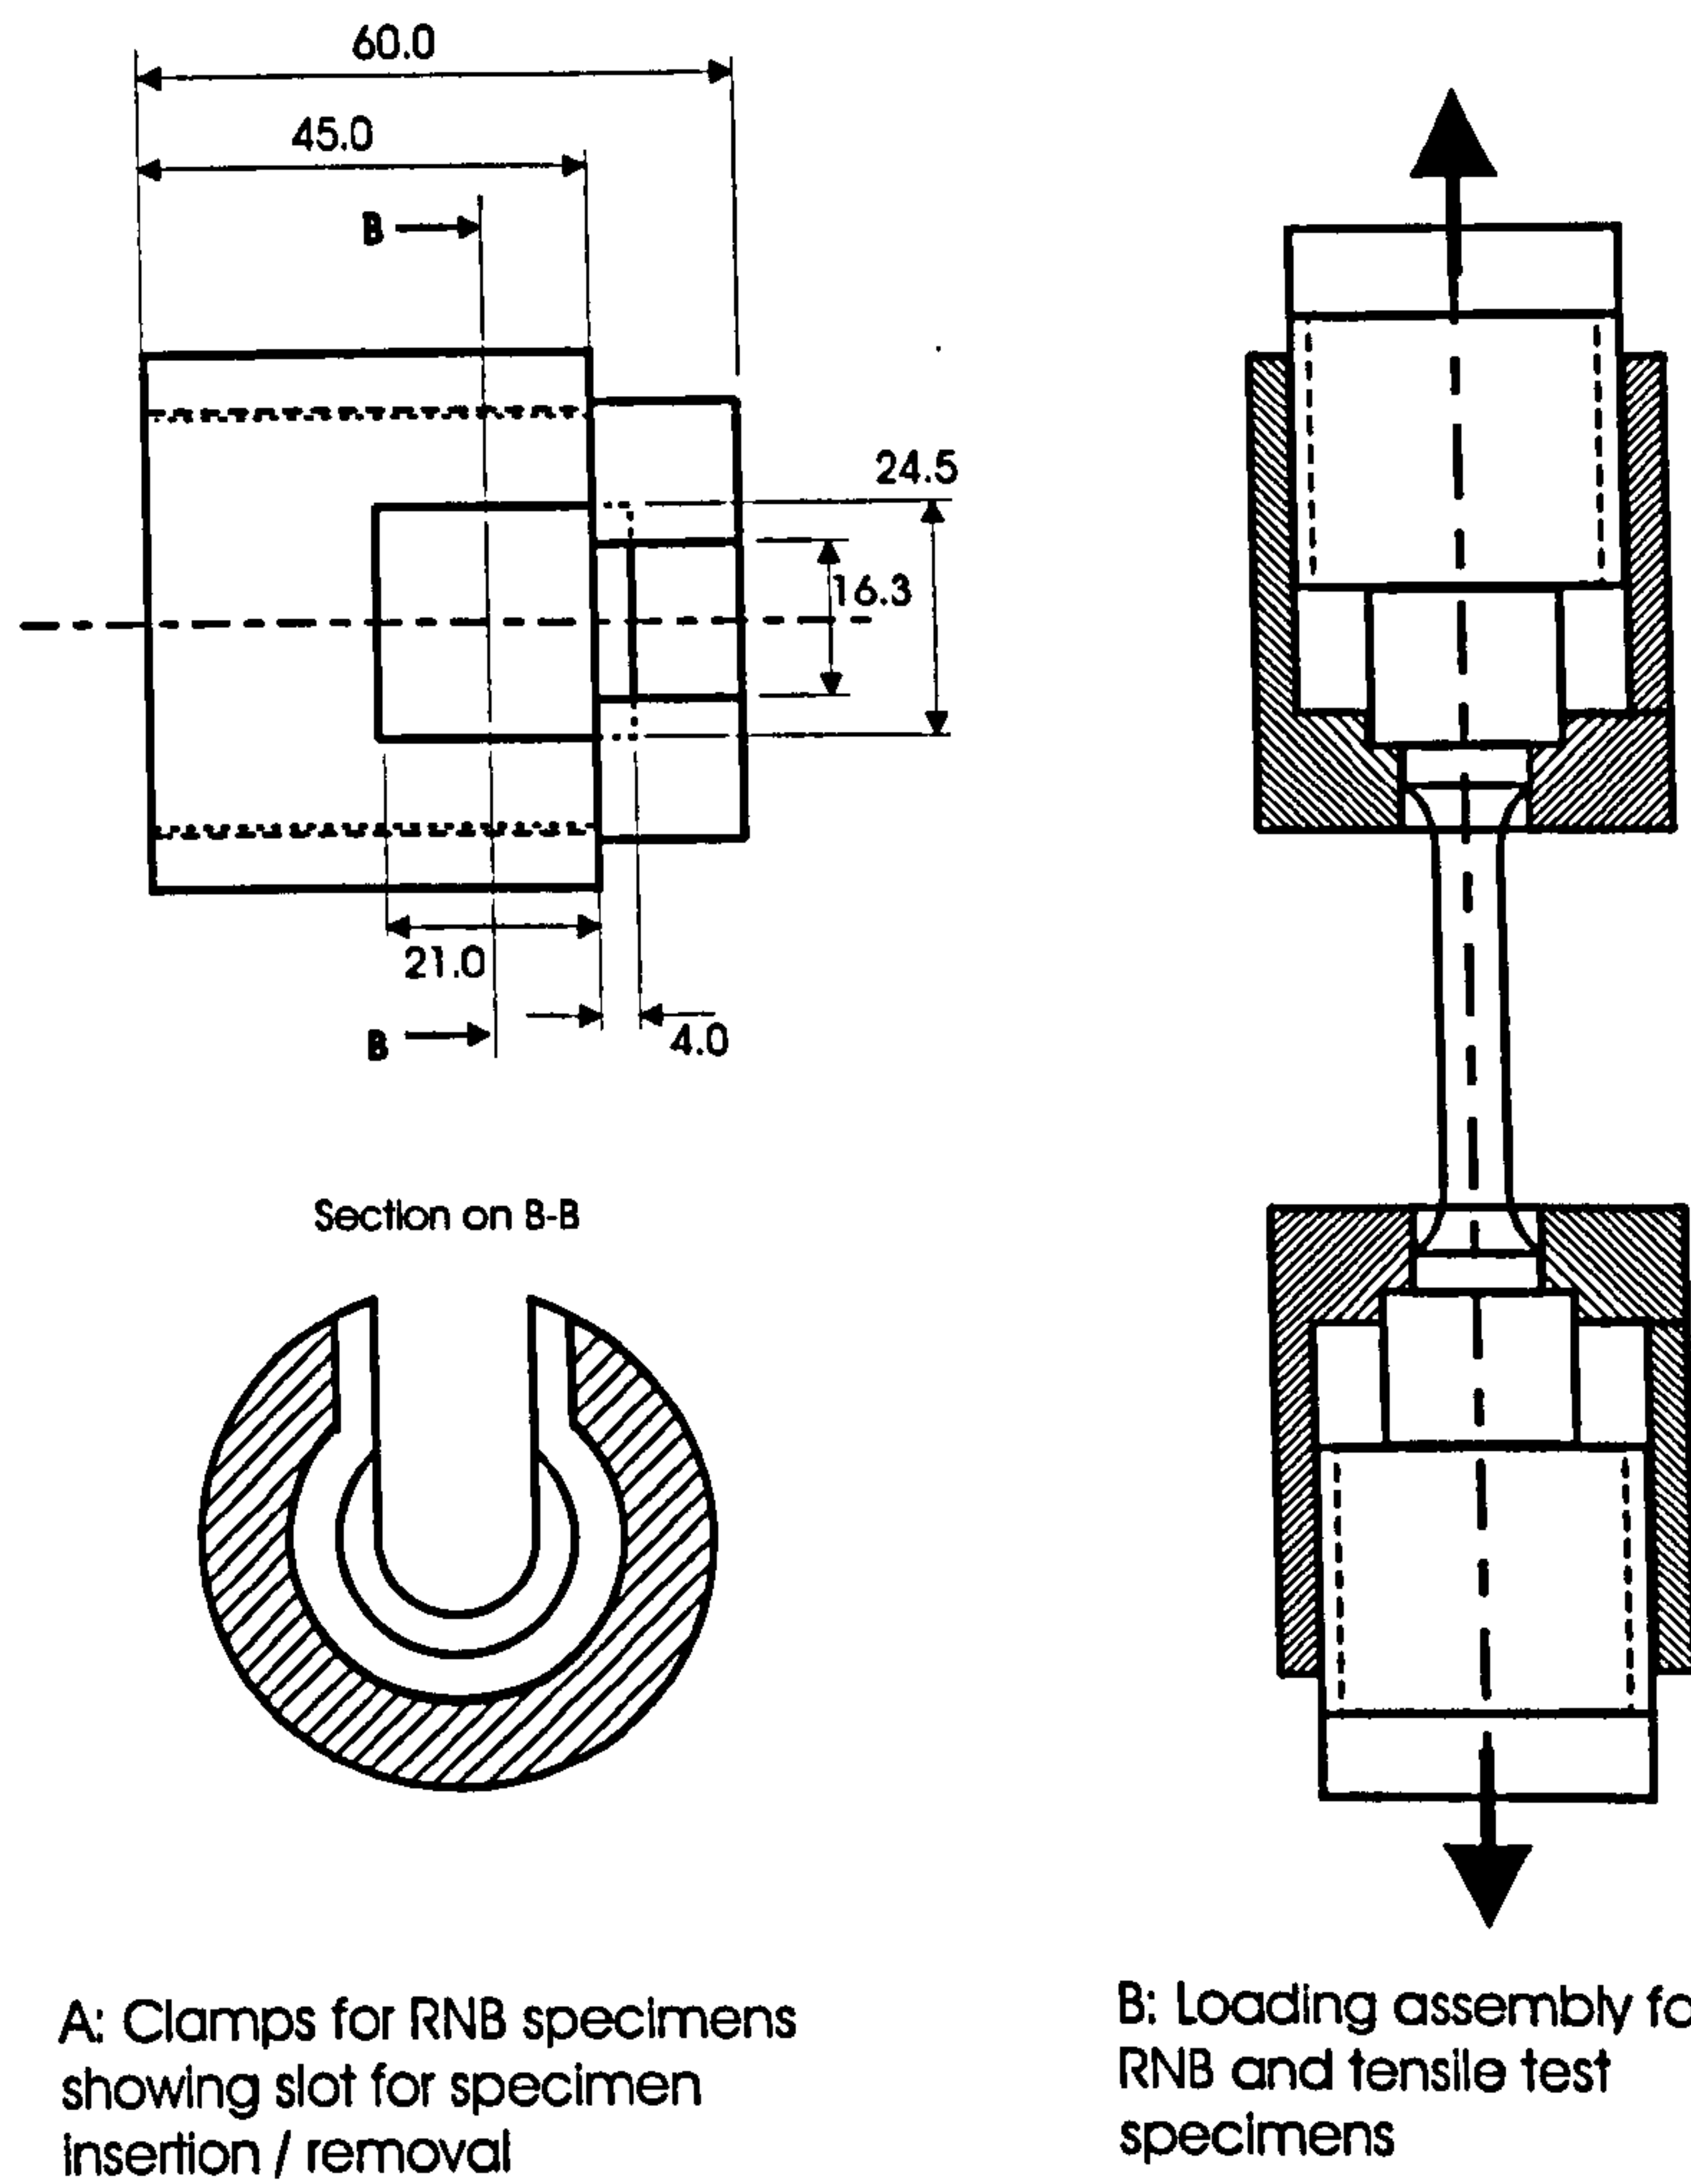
Clamping arrangement for low temperature tensile specimens. Dimensions in mm.
